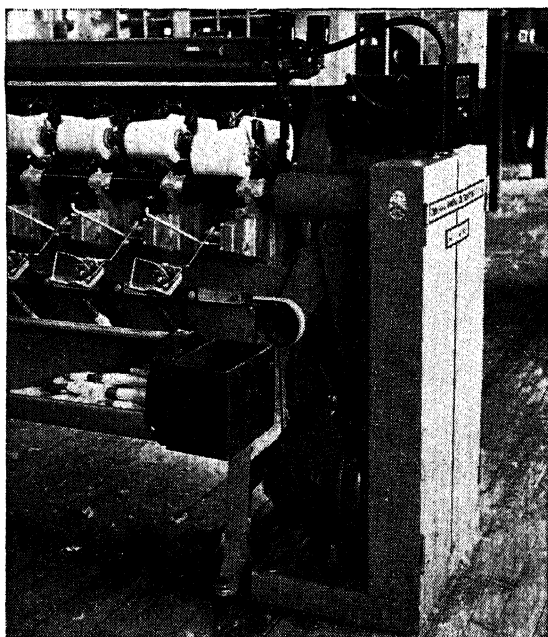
Drive end of this textile winding machine is of welded steel construction.
